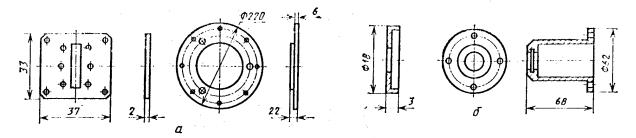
Examples of geometrically different parts with the same names and part numbers per NO.000.05 MNSChKh: a- flange (XX8.230.XXX per MNSChKh); 6 - bushing (XX8.223.XXX per MNSChKh)
